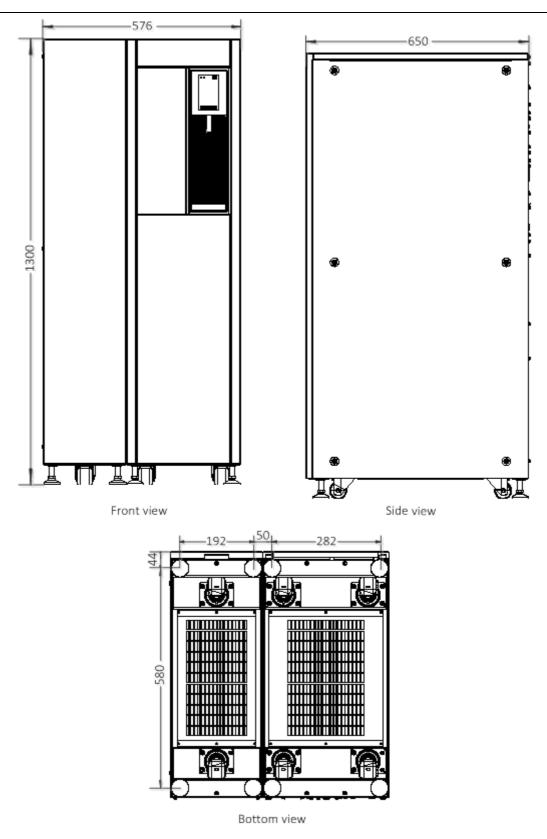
Front/side/bottom view of the UPS with side cabinet (unit: mm)
